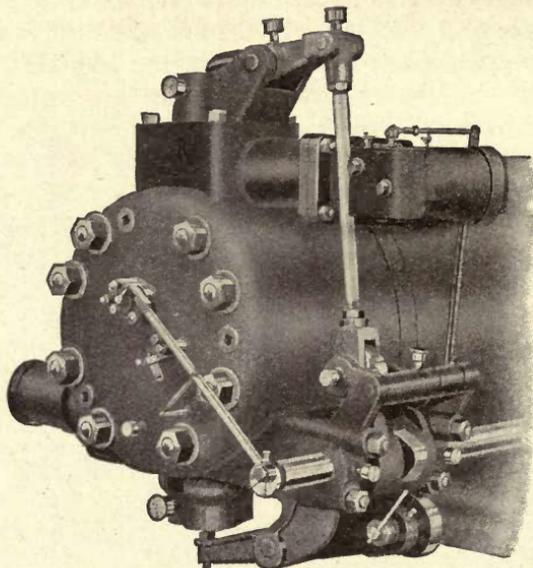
“Ingeco” cylinder head, showing igniter and trip rod.
